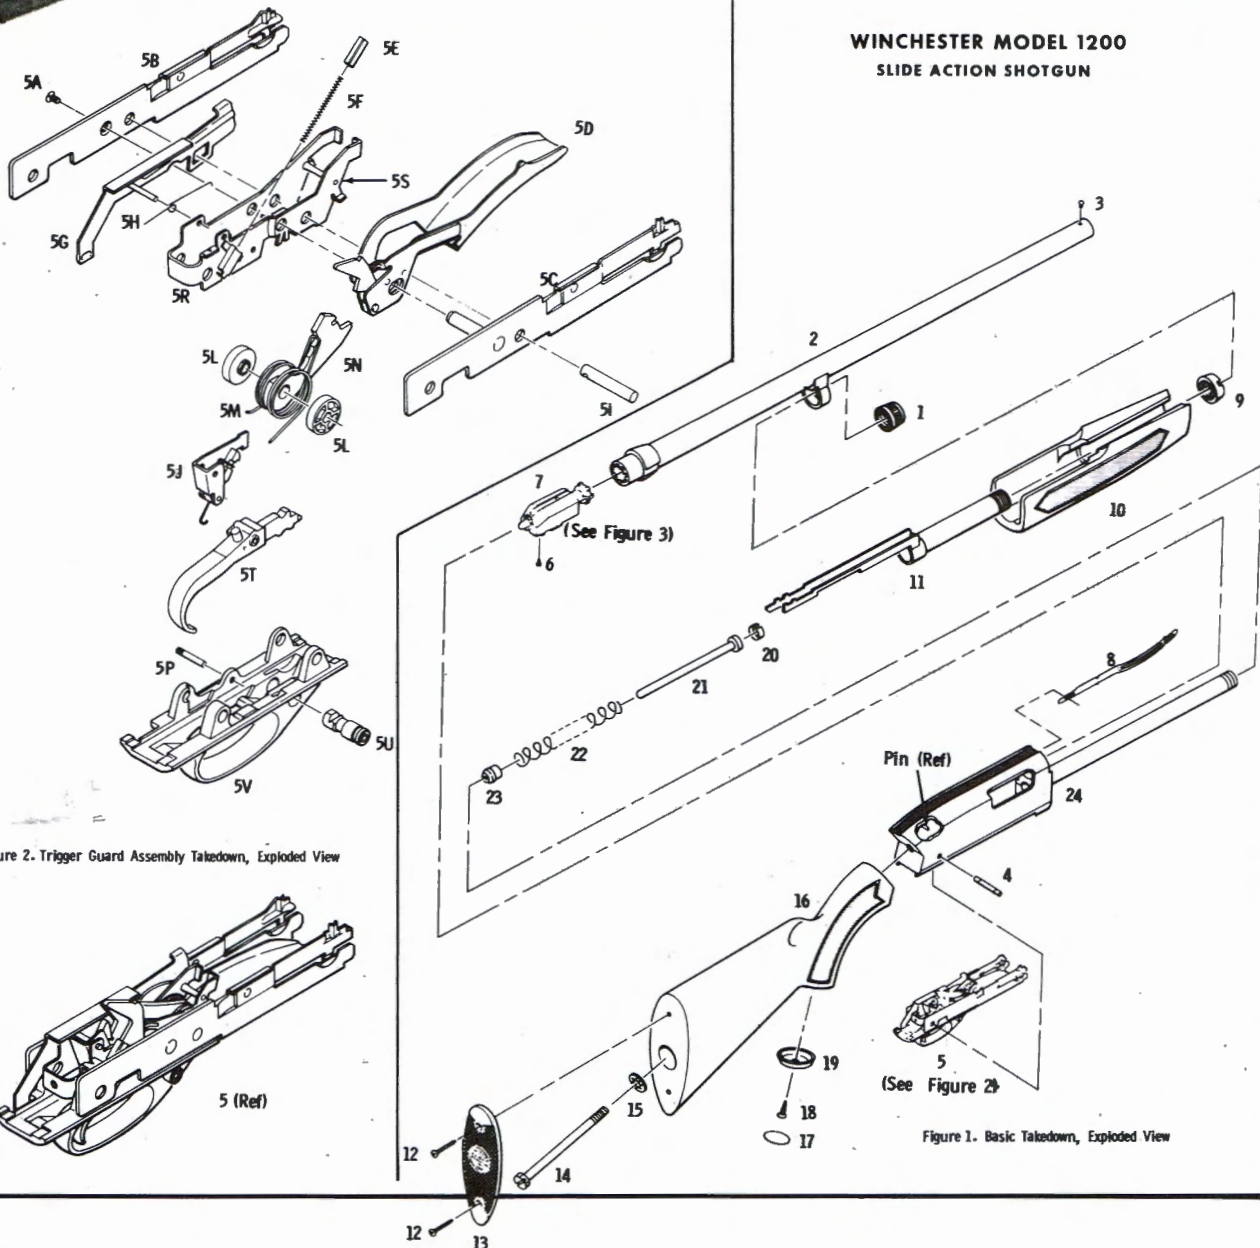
Trigger Guard Assembly Takedown, Exploded View
